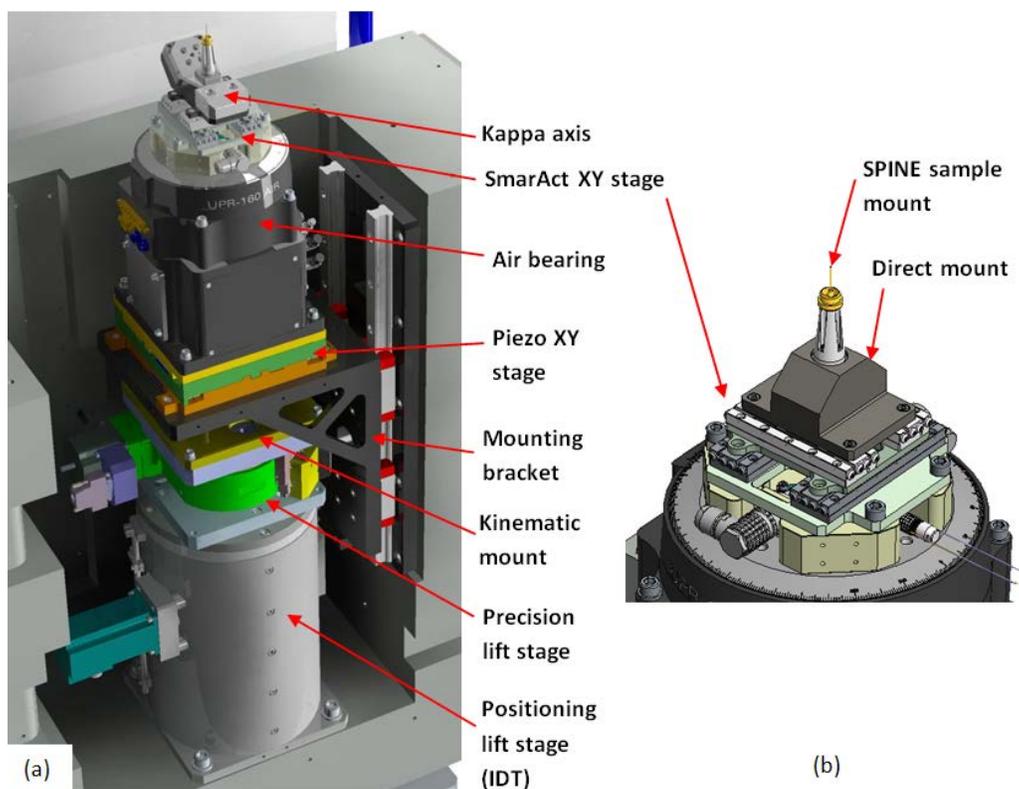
(a) Vertical goniometer assembly with kappa axis (b) Air bearing with a fixed sample mount on the centering stage
